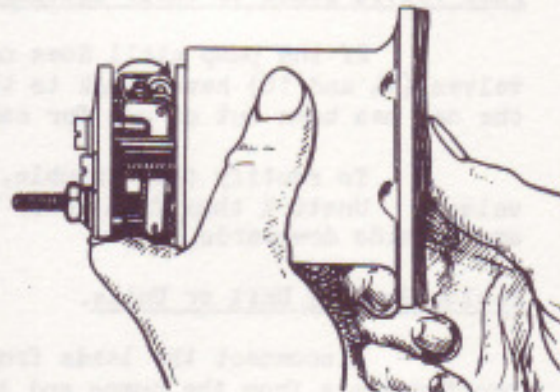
SHOWING METHOD OF HOLDING THE MAGNET HOUSING WHILE ADJUSTING THE DIAPHRAGM.
